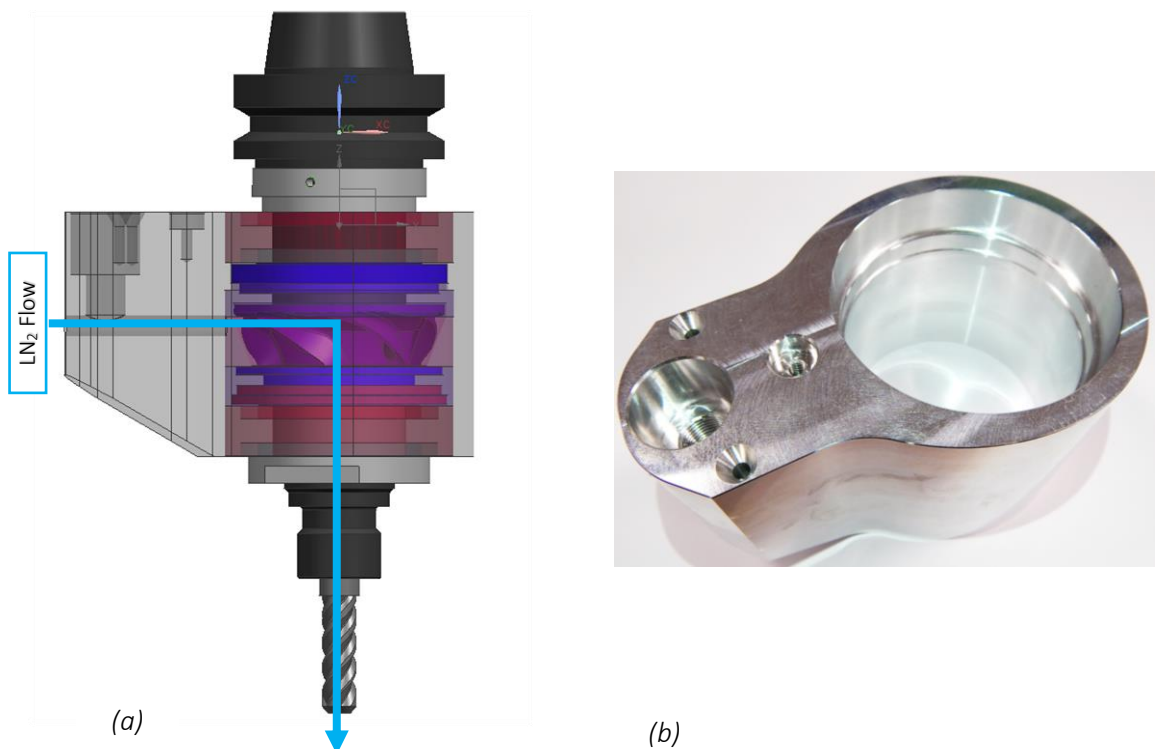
(a) CAD body cutaway, (b) Iteration 3 body manufactured
